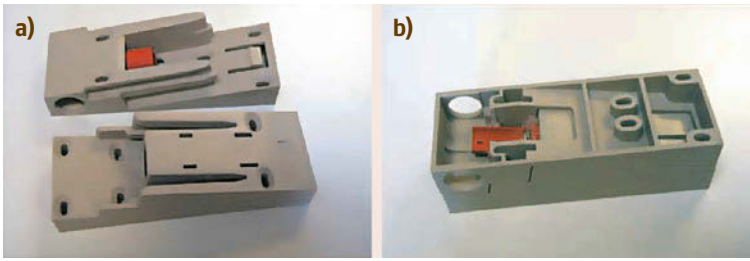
,b A piping and electrical drop-in connector shown (a) disassembled and (b) assembled
